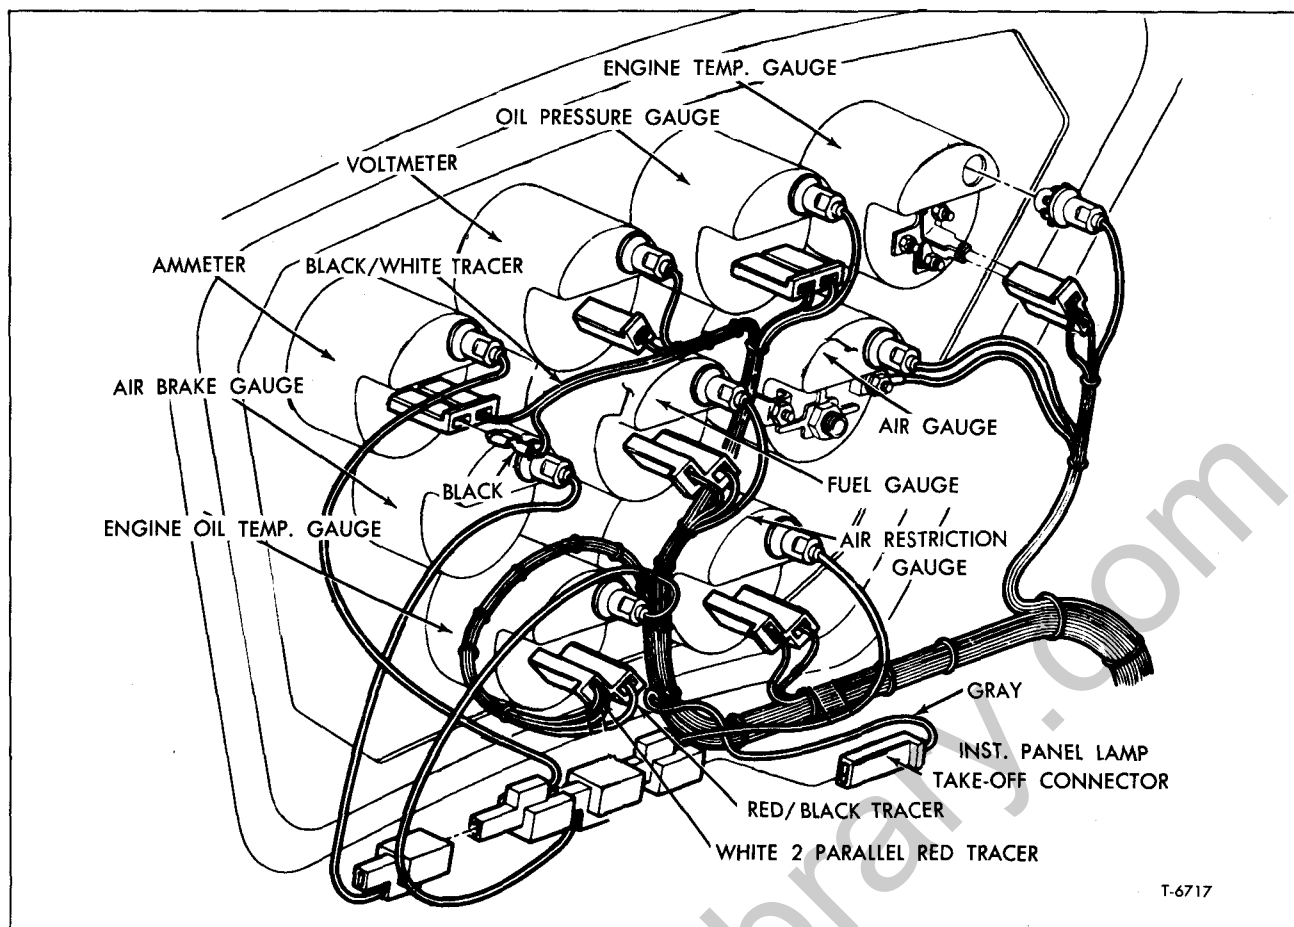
Rear View of Instrument Panel Gauges (Alum. Tilt Cab Models) (Typical)
